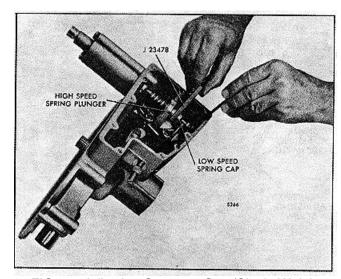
Adjusting Governor Gap (Single Weight Governor)
